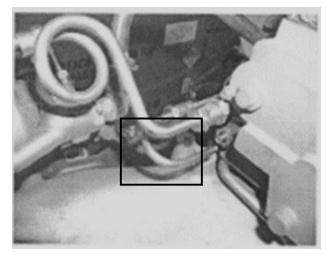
(a) Attachment location of the failed fuel tube of the aircraft engine MFCU
